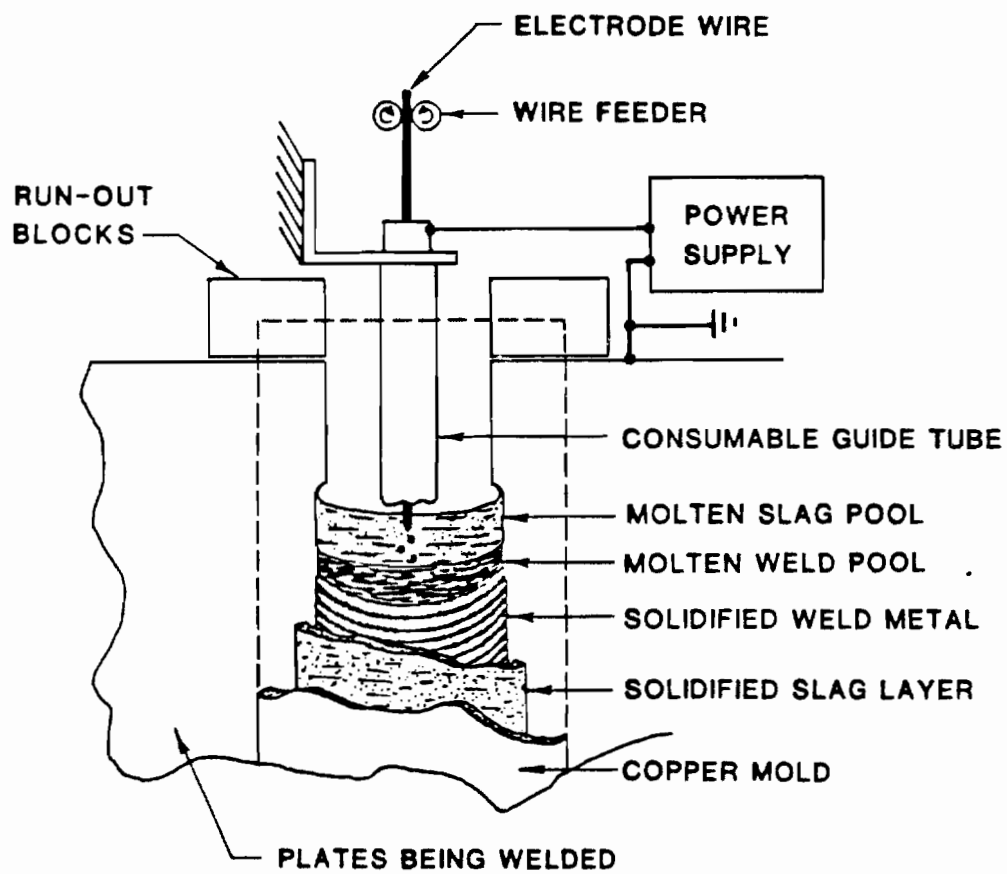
DIAGRAM OF ELECTROSLAG WELDING WITH A CONSUMABLE GUIDE TUBE.
